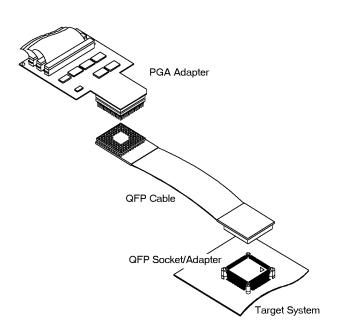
Connecting with PGA Adapter and QFP Cable
